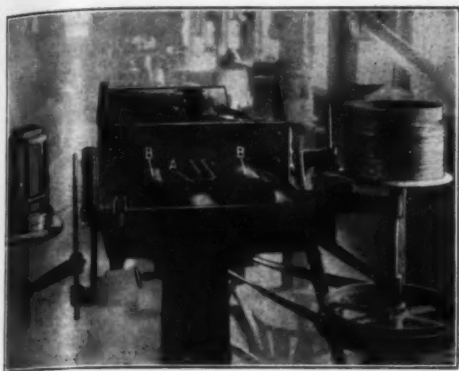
Another Continuous Wire Drawing Machine for Fine Wire.
